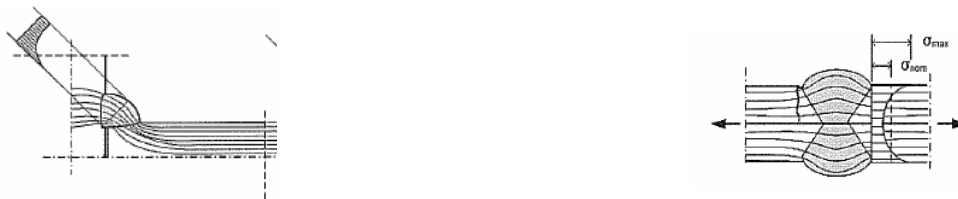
Stress concentration in a fillet weld (left) and in a butt weld (right) [8].
